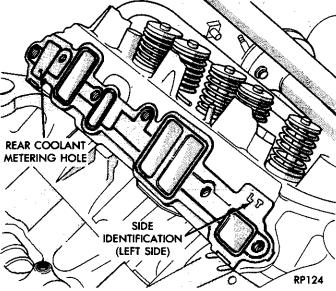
Intake Manifold Side Gaskets (3.9L Left Side Shown)
